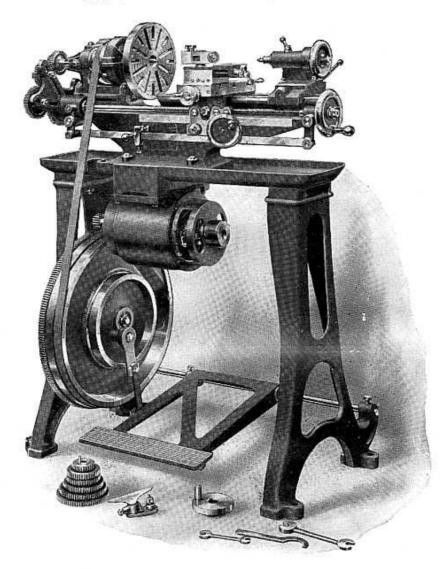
Lathe arranged for treadle and direct electric motor drive
